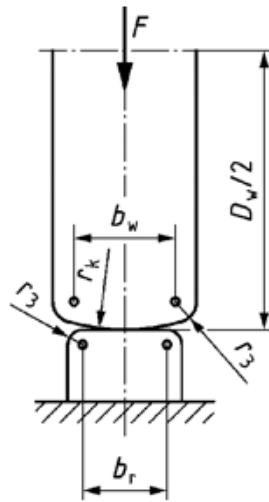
Wheel and rail dimensions including crown radius [35]
